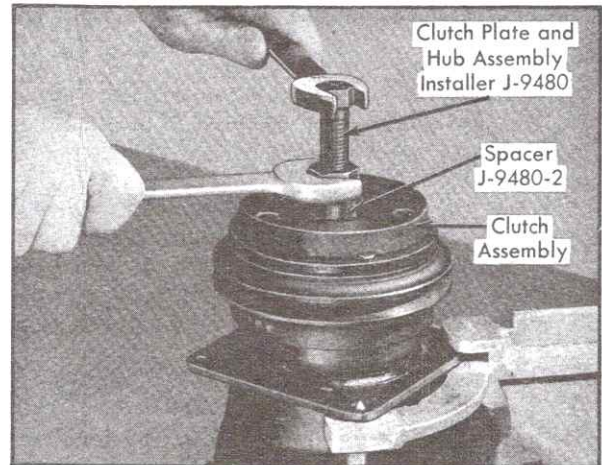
Installing Clutch Plate & Hub Assembly
